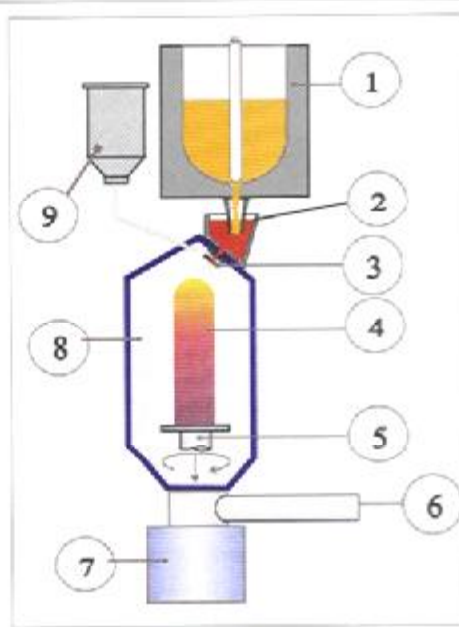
Principle of the Wieland-Spray Forming unit. 1 = Holding furnace, 2 = Tundish, 3 = Atomizer, 4 = Billet, 5 = Withdrawal/rotation unit, 6 = Exhaust gas, 7 = Overspray container, 8 = Spray chamber, 9 = Particle injector
